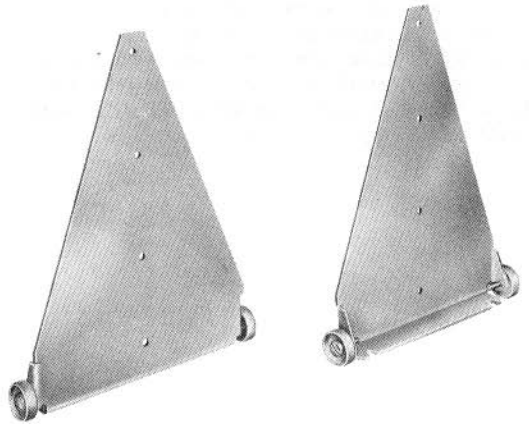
Bracket Assembly per ED-69366-50, Group 2
